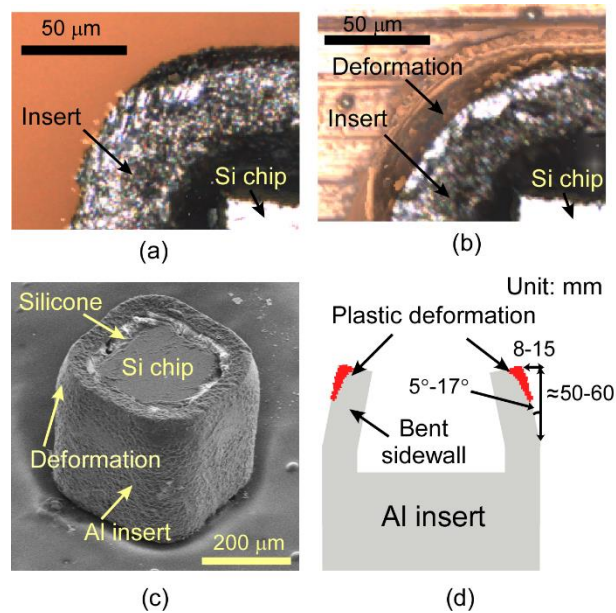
Validation of micro-crimping. Images of: (a) a corner of an insert with a Si chip before micro-crimping; (b) the same insert with the Si chip after micro-crimping and disassembly. (c) SEM image of a typical insert with Si chip after micro-crimping and disassembly. (d) Typical measured values of structural bending and plastic deformation after the micro-crimping process.
